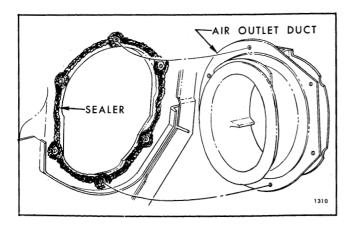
Shroud Side Air Outlet Duct Sealing
